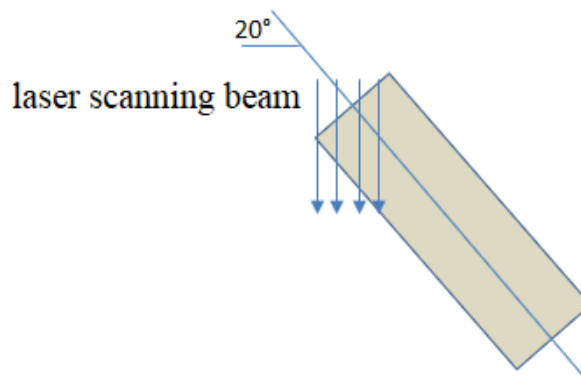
1; The working principle of machining using picosecond laser is based on material removal by scanning the sample. The fibre is mounted in a holder that is able to control rotation in all axes so that it can be rotated by 20° in order to machine a 70° mirror.
